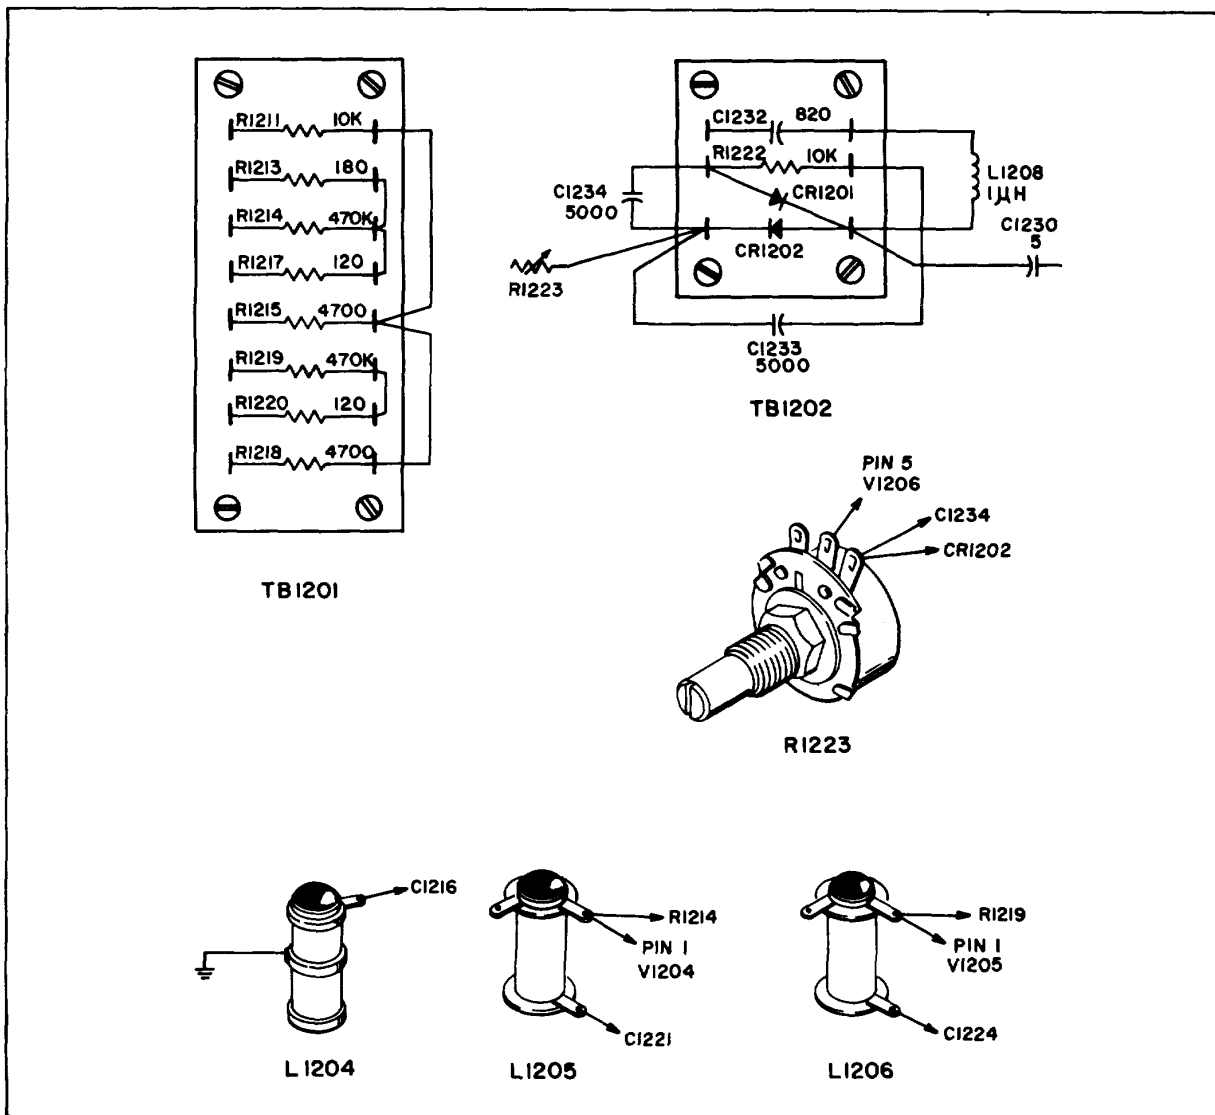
Details of Terminal Board and Variable Components, CV-394/USA-5
